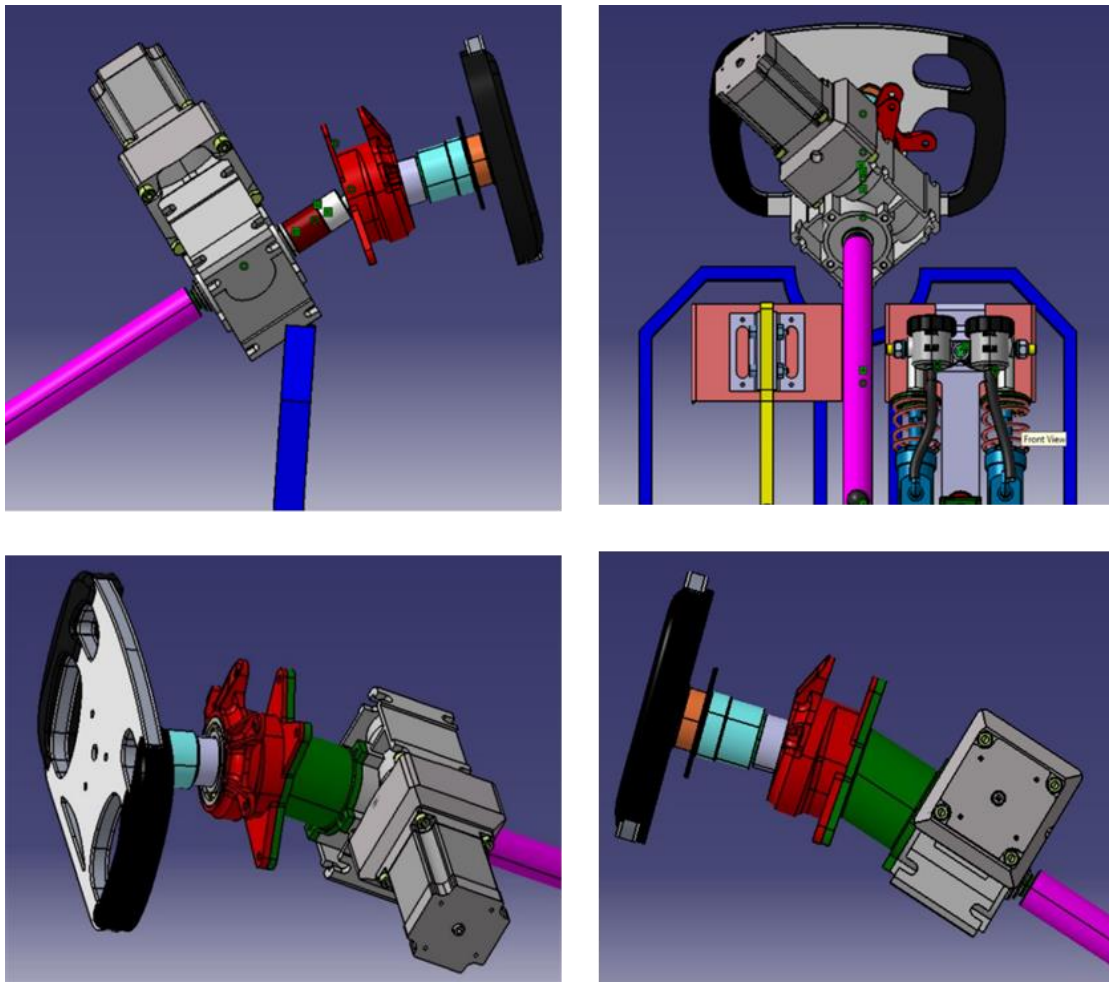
Solution 1 - Stepper motor with worm gearbox in SC18
